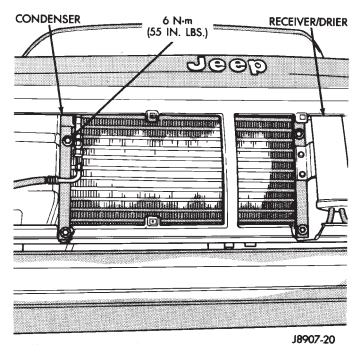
Condenser Mounting Bolts—XJ Models— 2.5L 4-Cylinder Engine—Typical
